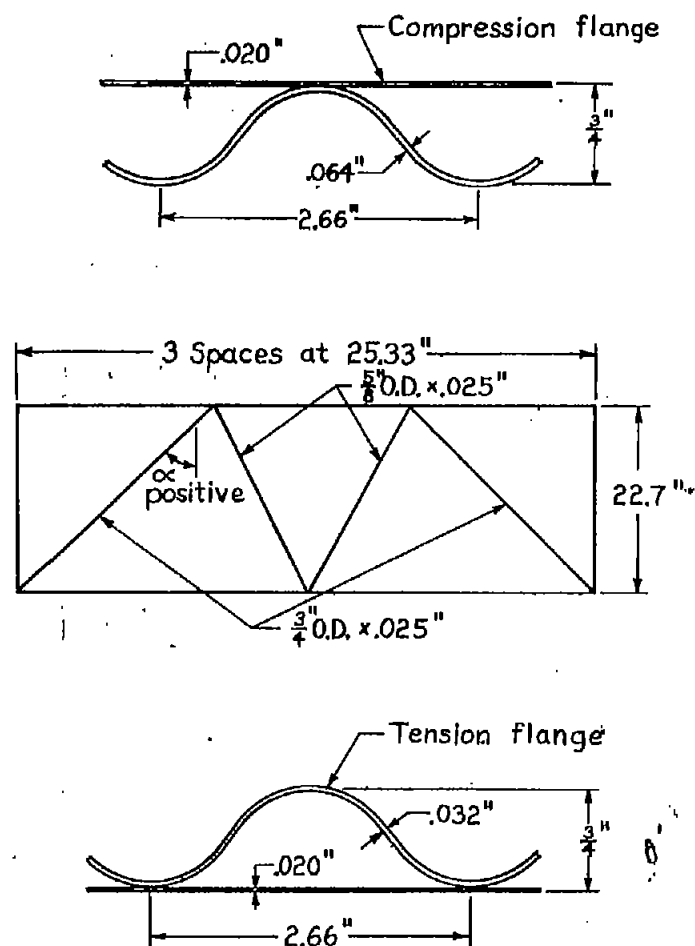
Rib and box-beam flanges for design problem. Flanges riveted to rib chords at each corrugation.
